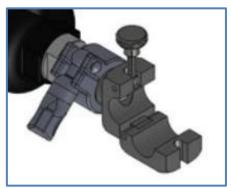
PV valve body during set up No crush hazard is present when the valve body is open
